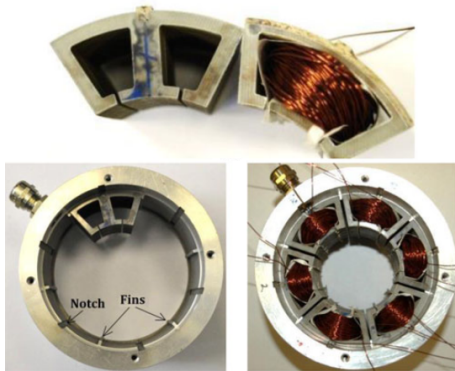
Example of a small-scale modular machine using a press fit [46].
